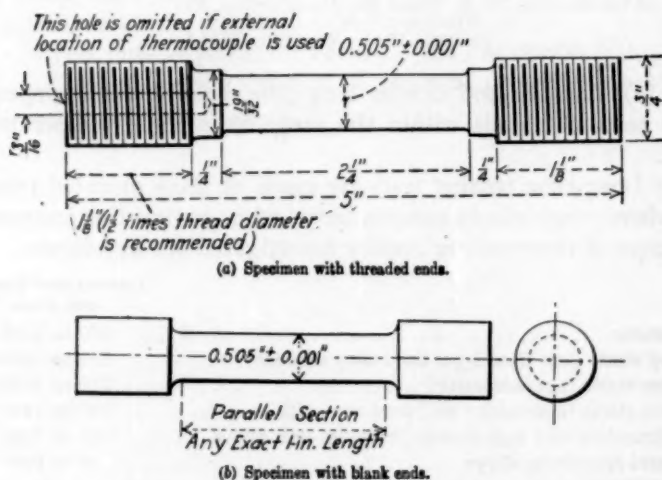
Test Specimens for High-Temperature Tension Tests.
